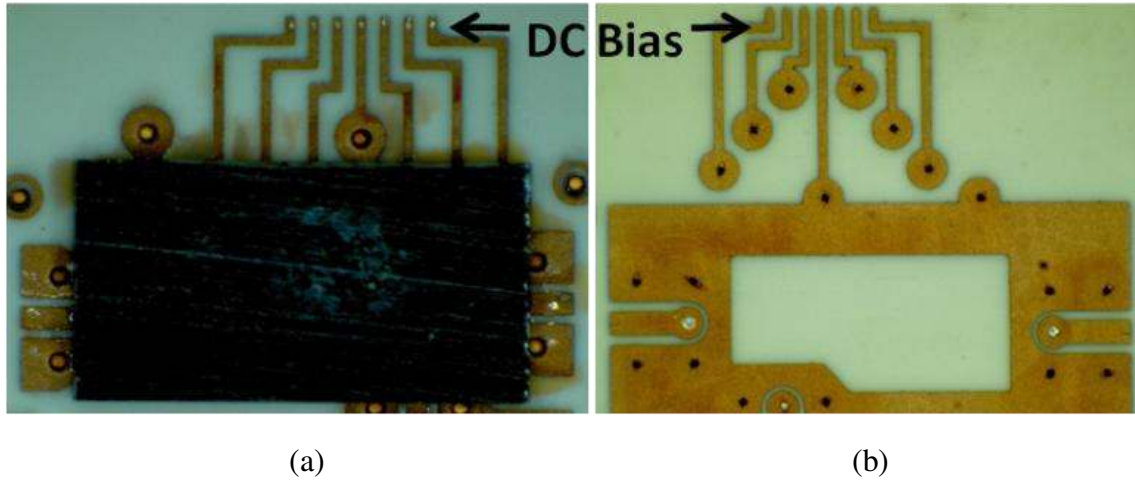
Fabricated and assembled a.) standard flip-chip package and b.) embedded flip-chip package.
